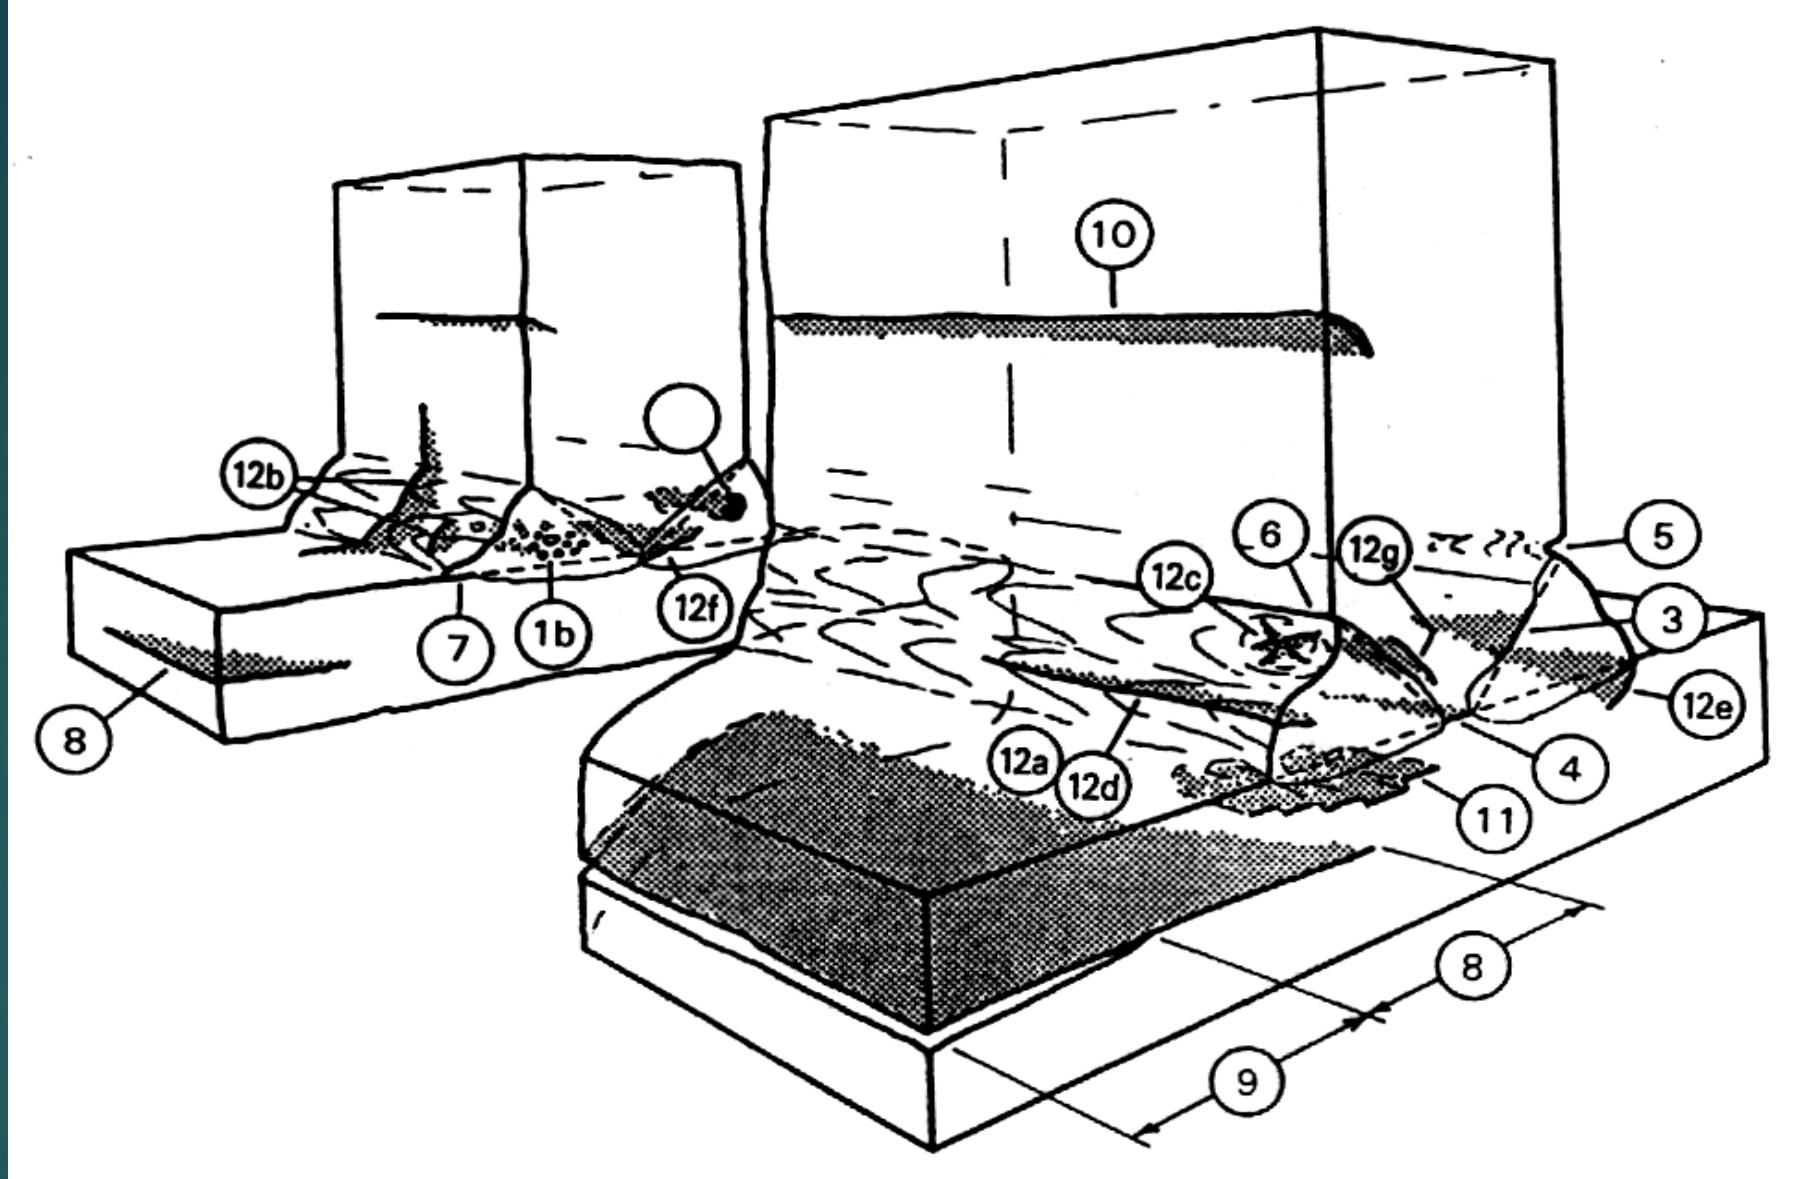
Combined Groove and Fillet Welds in T-Joint
